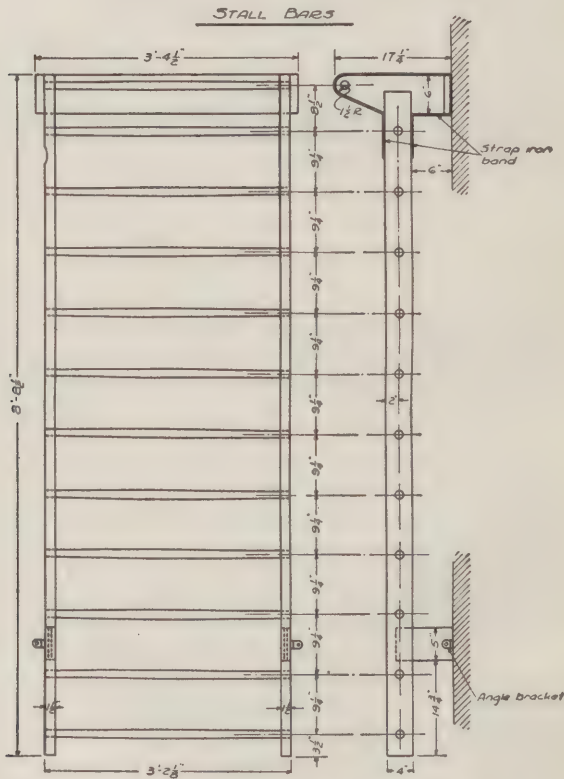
Plan for stall bars to be used as a means of exercise by patients who have undergone leg amputations. All of the wood should be white oak of grade 1. The rungs should be tapered to 1 inch (2.5 cm.) diameter at each end and $1\frac{1}{4}$ inch (3 cm.) diameter in the center, and all surfaces should be smoothly finished and polished. The scale of the plan is an inch to the foot (2.5 cm. = 30 cm.).
